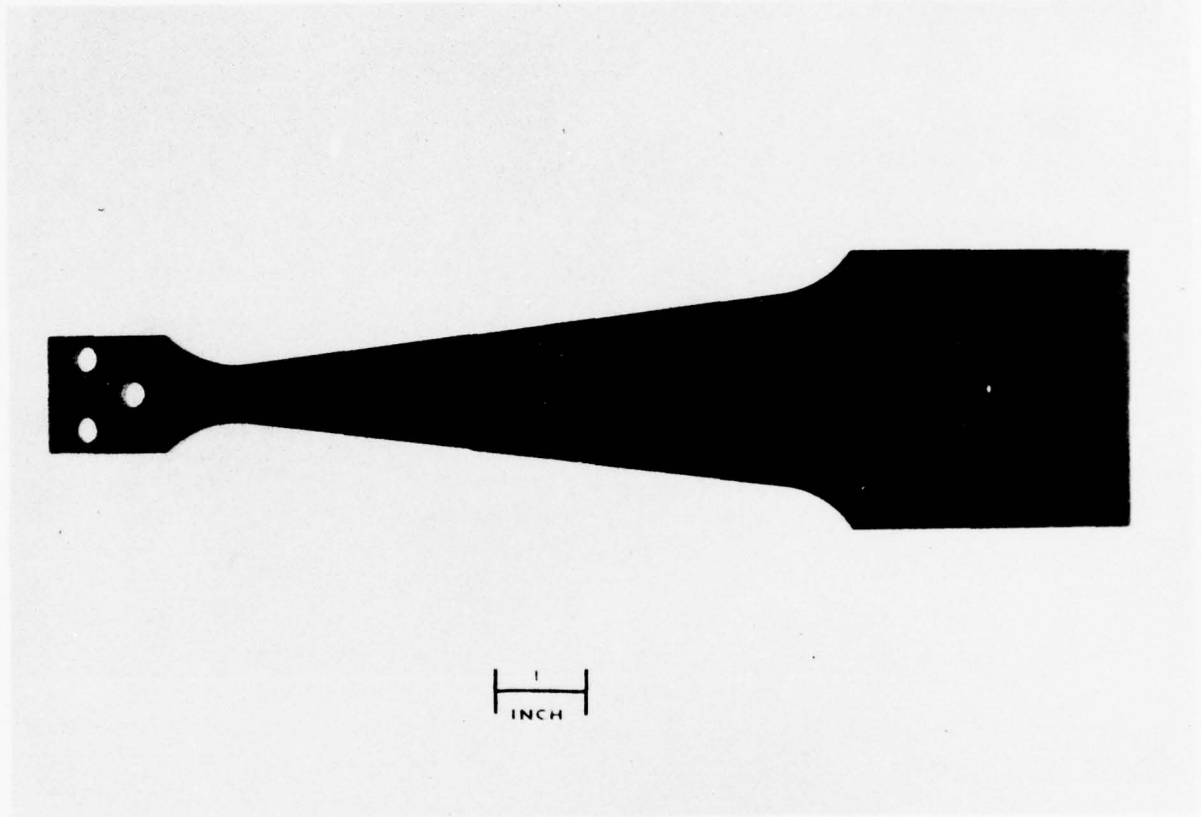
6.4 mm(.25 in) thick HY130 plate fatigue specimen with E12018 stick weldment (for Series 4a to 4e)
